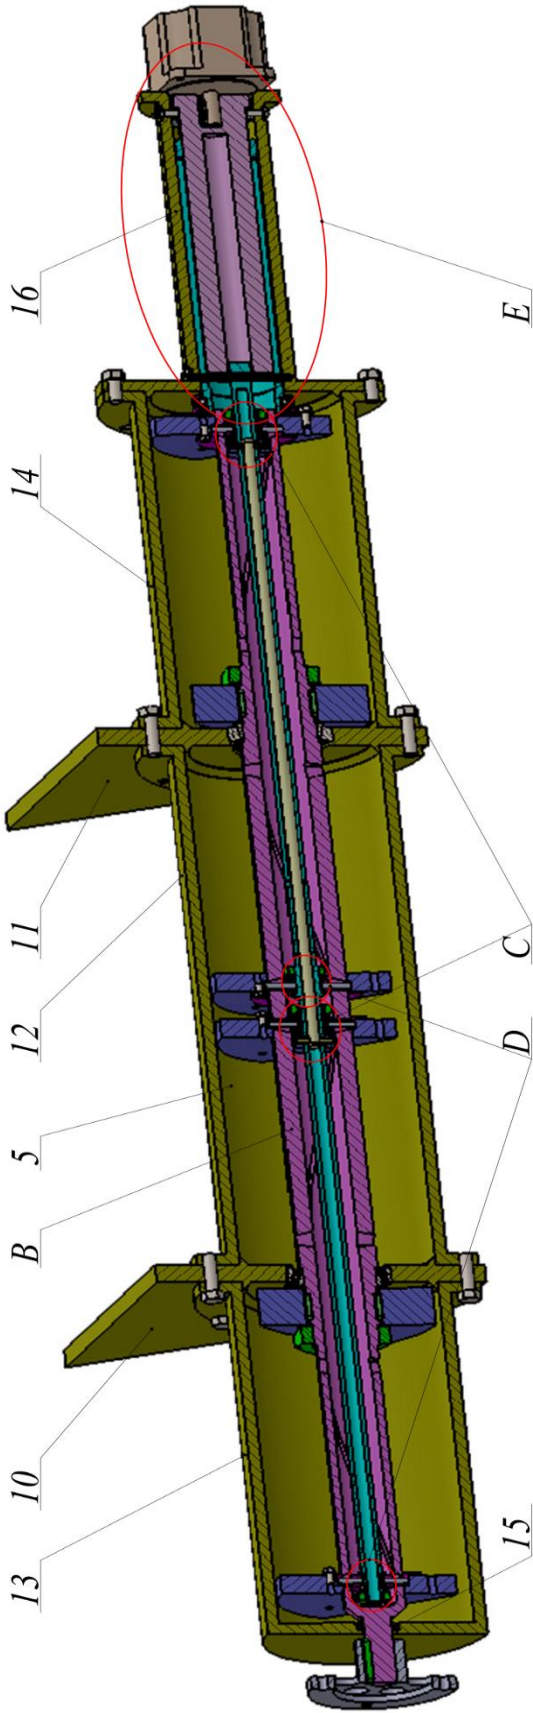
Design of a controlled symmetrical unbalanced vibration drive in assembly
